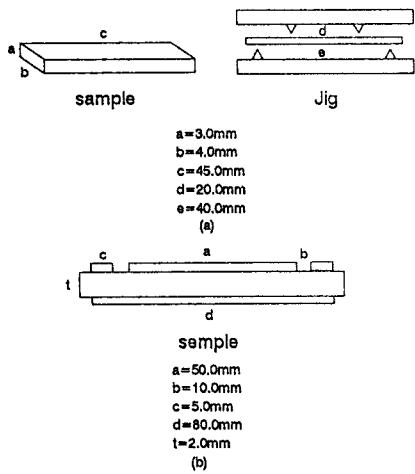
Sample Shape for Mechanical(a) and Electrical(b) Test
